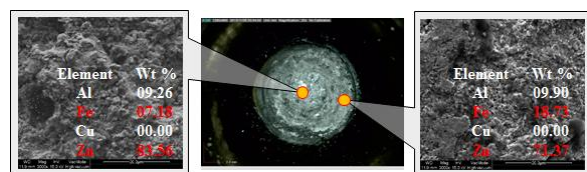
SEM micrograph of lower electrode of two sheet steel surface after 2000 welds
